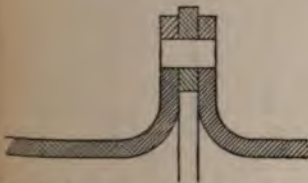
Section of the Adamson original Flange Seam for Lancashire Boiler Flues.
